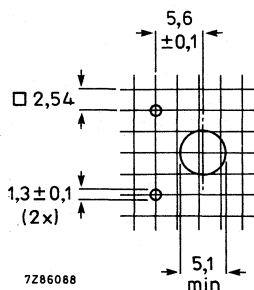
Hole pattern for mounting on a printed-wiring board.
